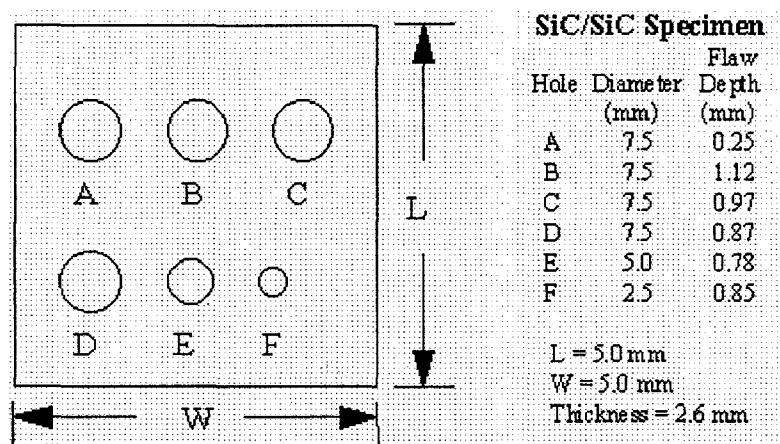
Schematic illustration of the Dow Corning SiC/SiC CFCC specimens with machined flat-bottom holes.
